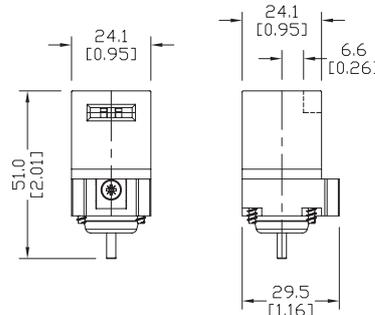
90° adjustable head with shaft hinge interlock - SP2K72, SDM2K72 models
